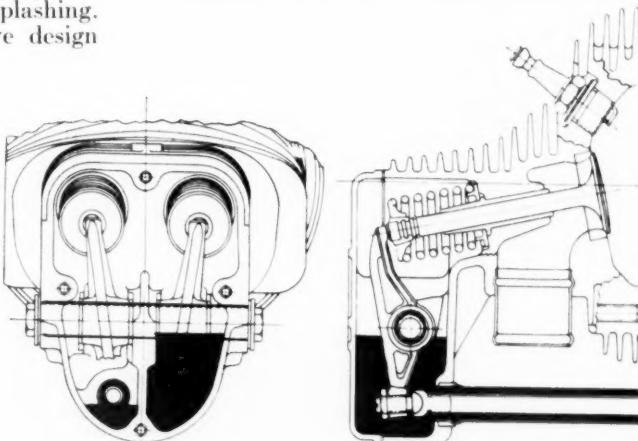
Sectional views of rocker box in 4-cylinder horizontally opposed Lycoming Engine. The black areas indicate passage of oil in rocker box.
